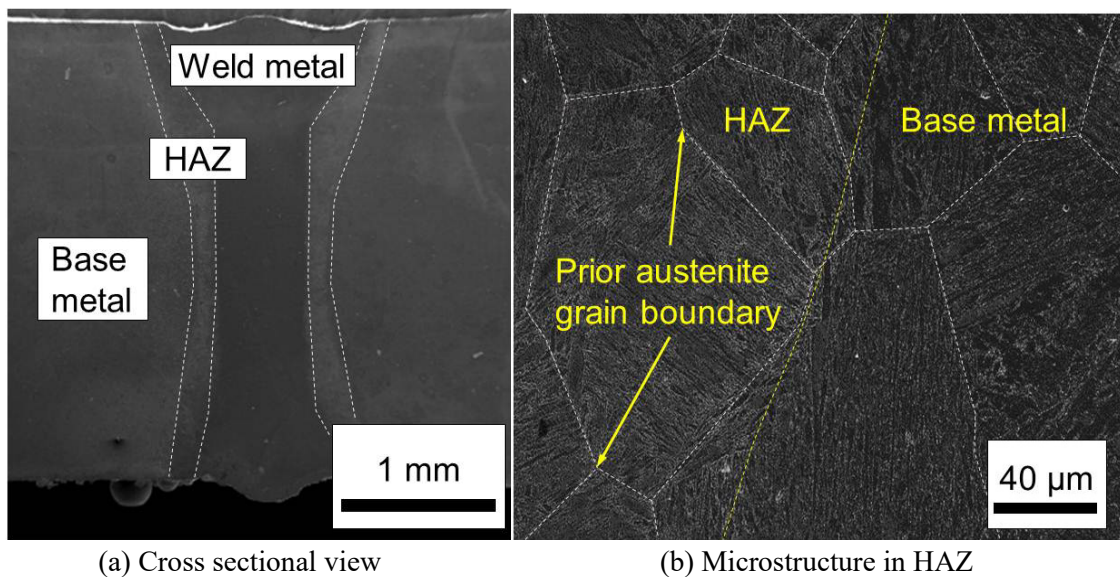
Cross sectional view and microstructure in HAZ of a welded joint
